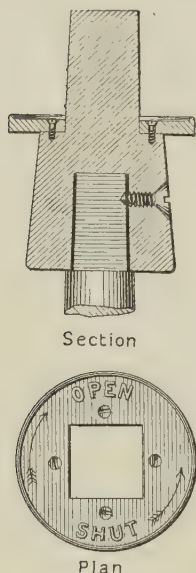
Adjustable Cap and Brass Indicator Plates for Spindle Heads
